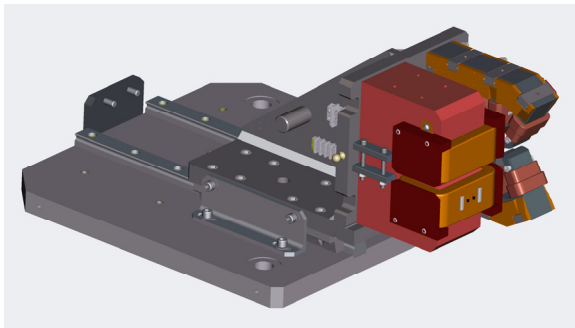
Image of 31010101-505100 center magnet and rail base assembly
